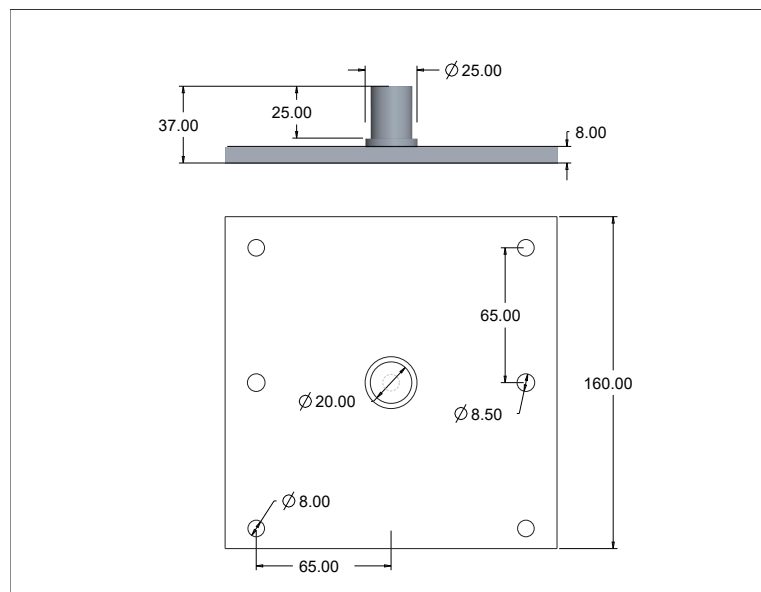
Parts to fix bend fixture on small ISMF CNC machine (dimensions are in mm)
